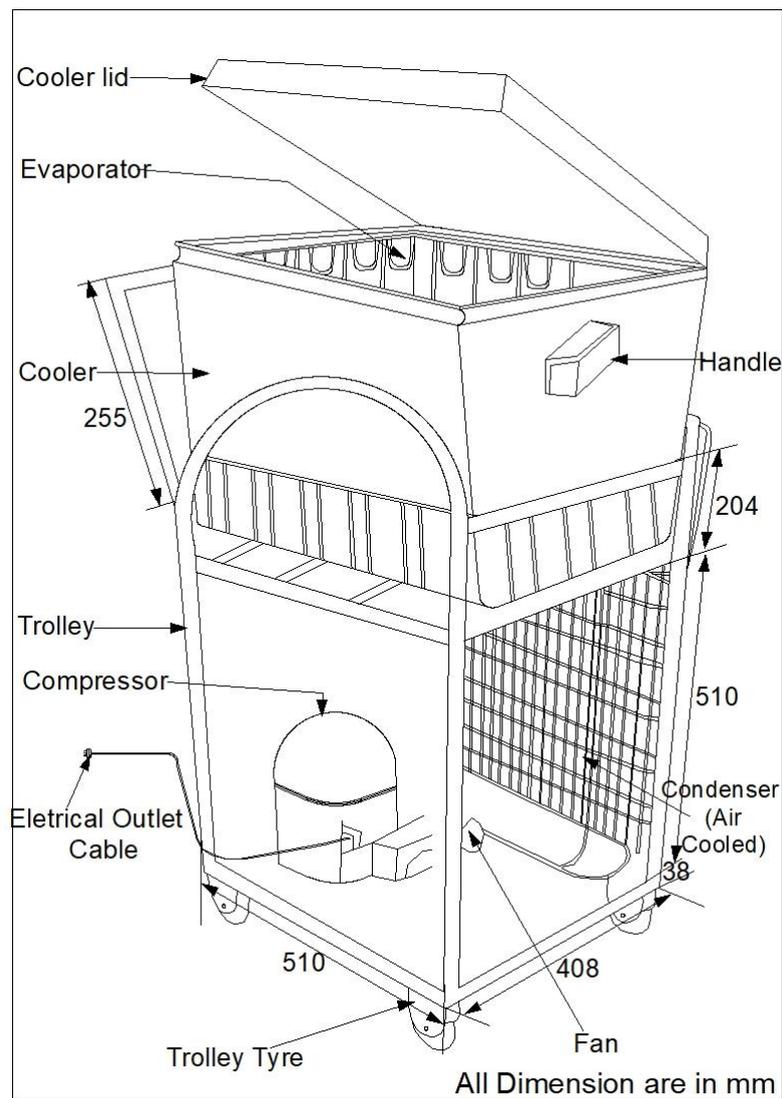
Three-dimensional drawing of the fabricated refrigerator
